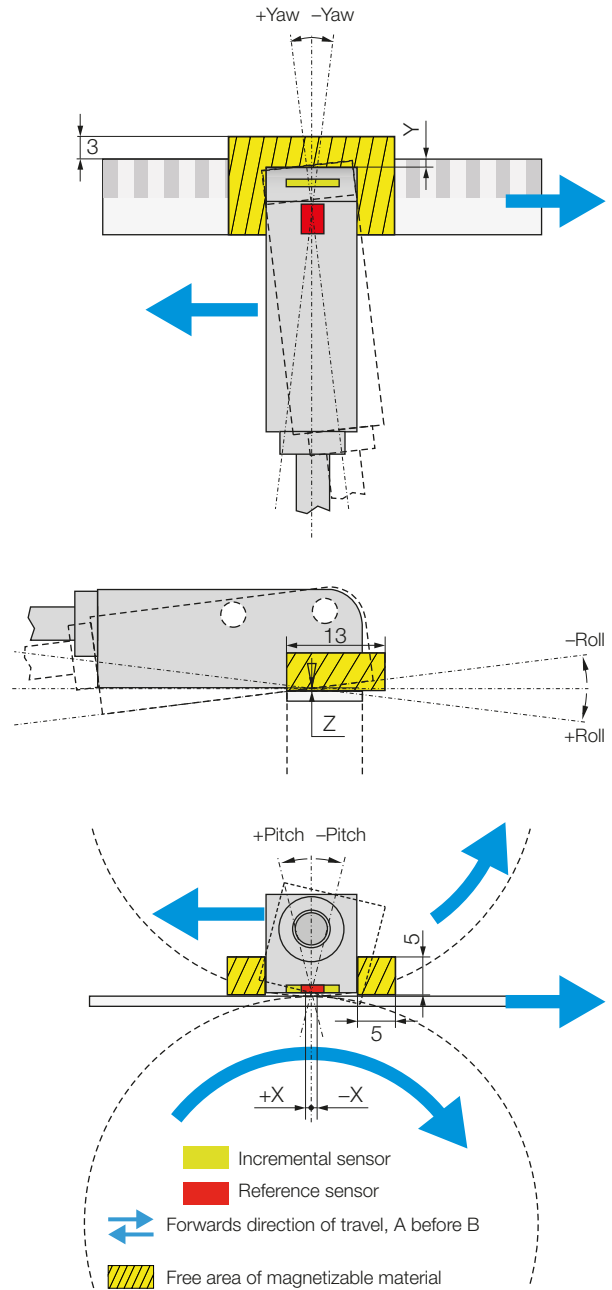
Distances and tolerances BML-S1F2...
